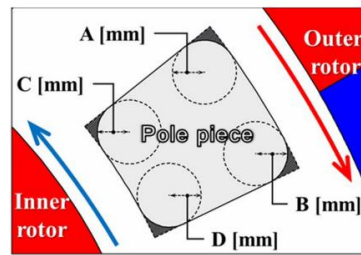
FMP shape with 4 locations of fillet to be removed.
